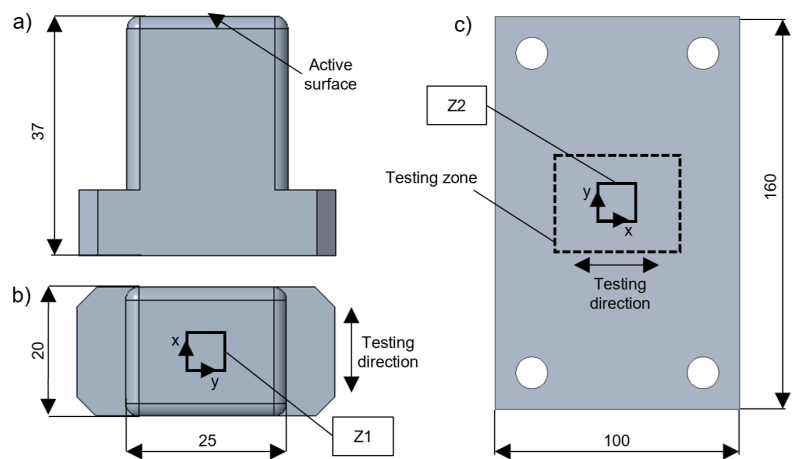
Punch and specimen geometries: a) punch front view; b) punch plant view; c) specimen.
